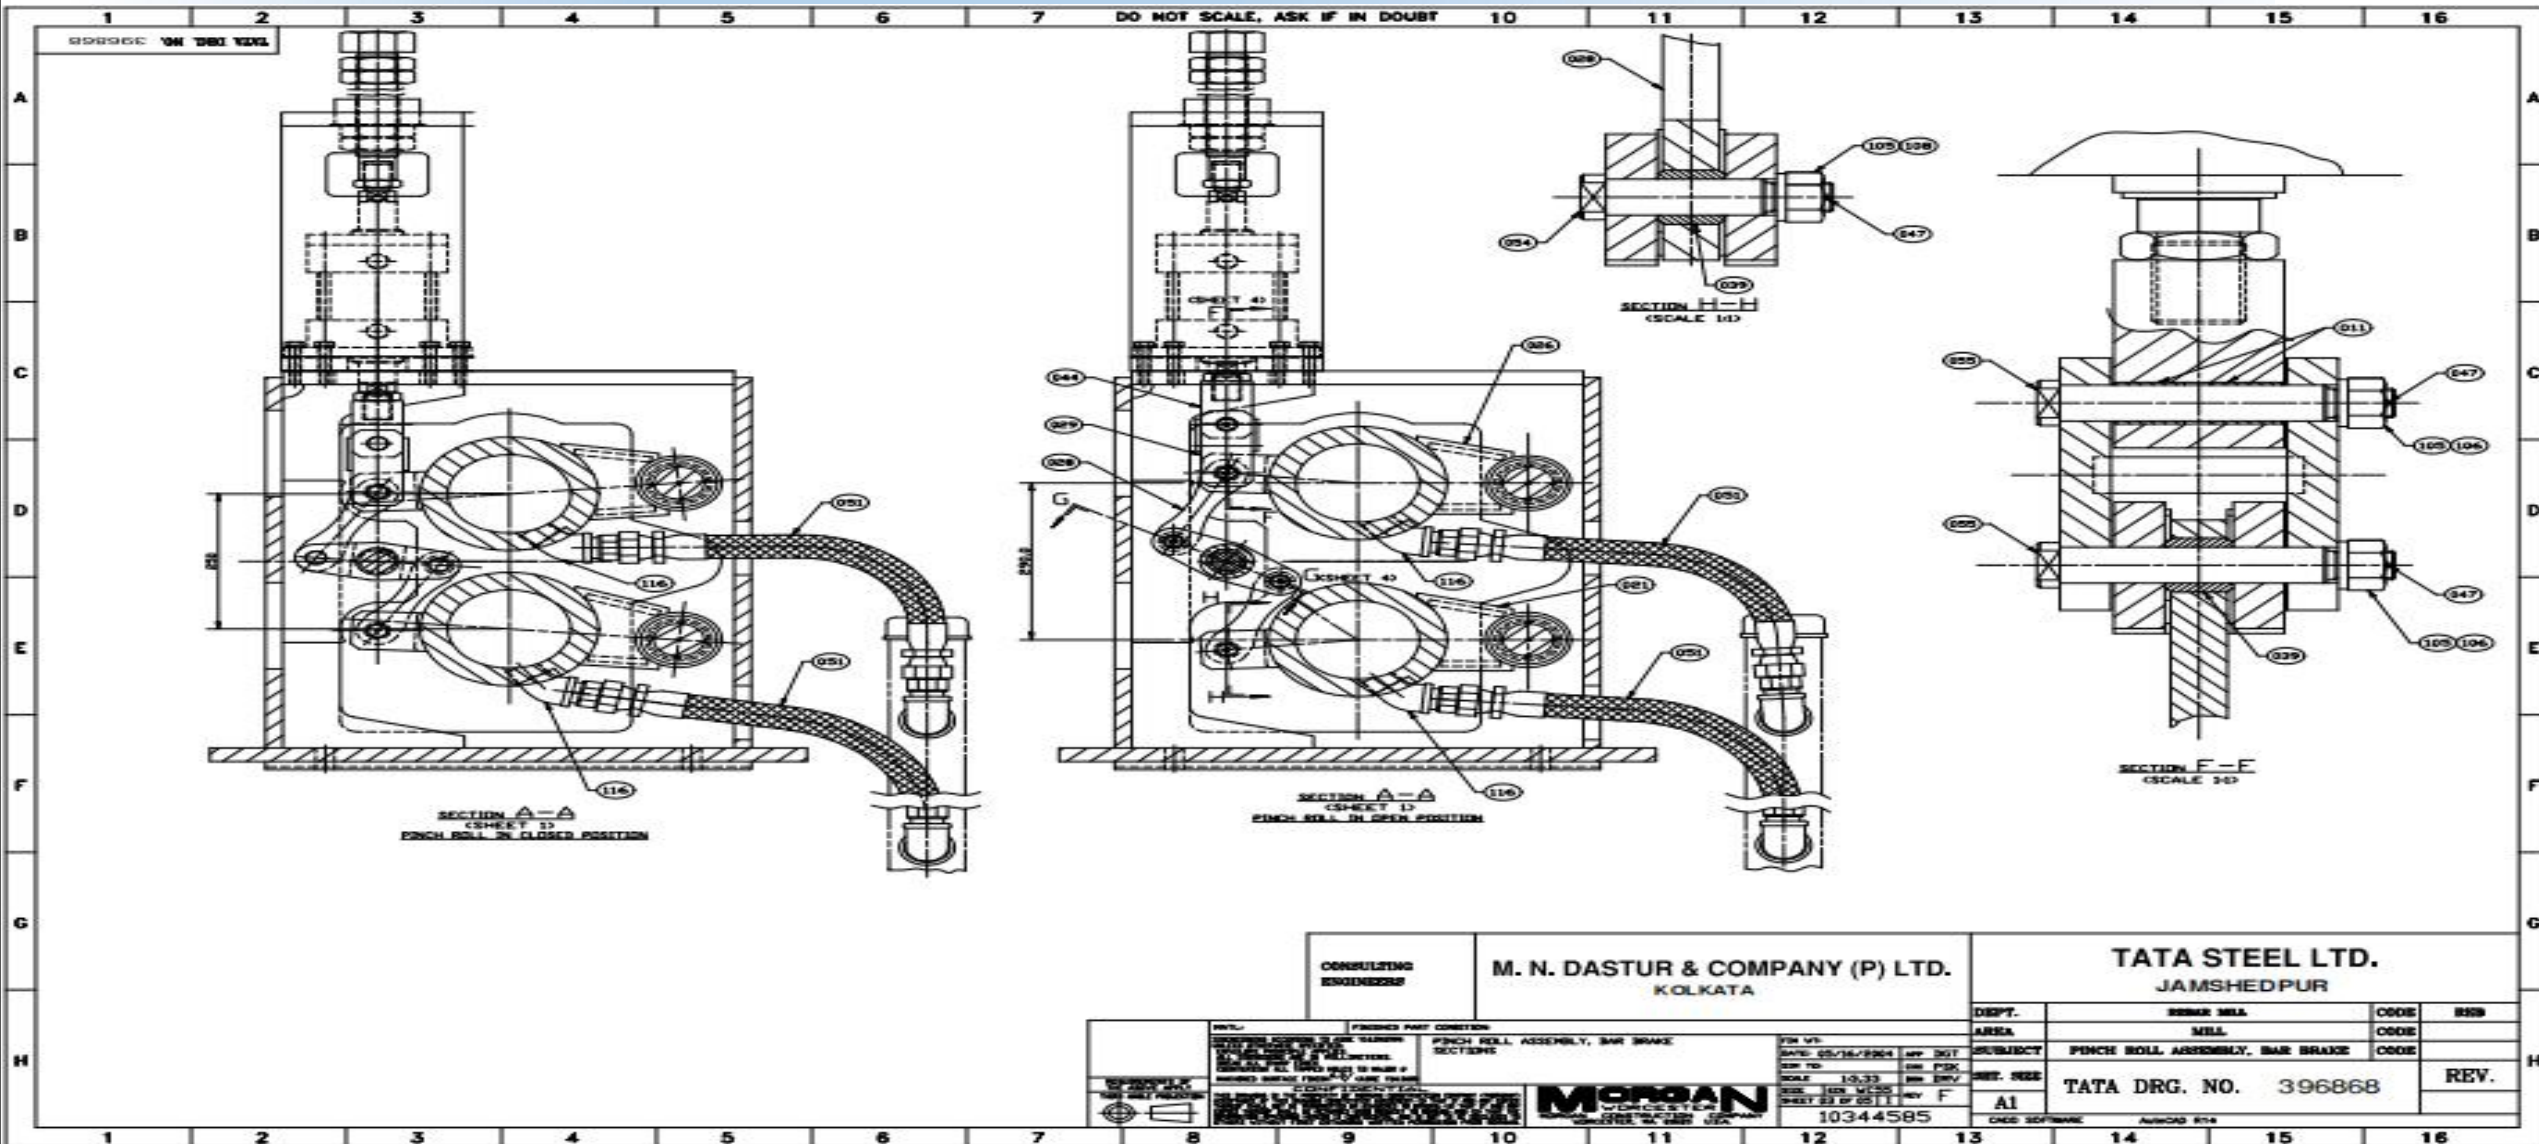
Overview Drawing also shown the how Bar Braking Pinch Rolls Assembly works, drawn in AutoCAD
